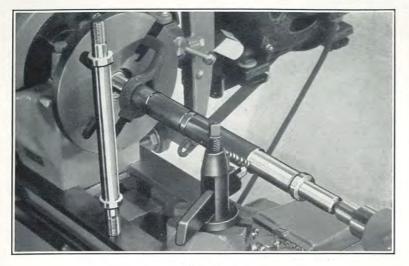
A small alloy steel grinder shaft being turned in the lathe. The finished shaft is also shown. Note the grooves made by the cut-off tool for blocking out the work for roughing (see page 162).
